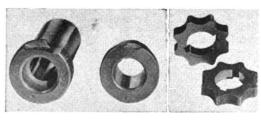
(Left) The finish and accuracy required in drill jig bushings can only be obtained economically by honing. Fig 7—(Right) An example of carburized steel parts that are finished to fine limits by the use of the
